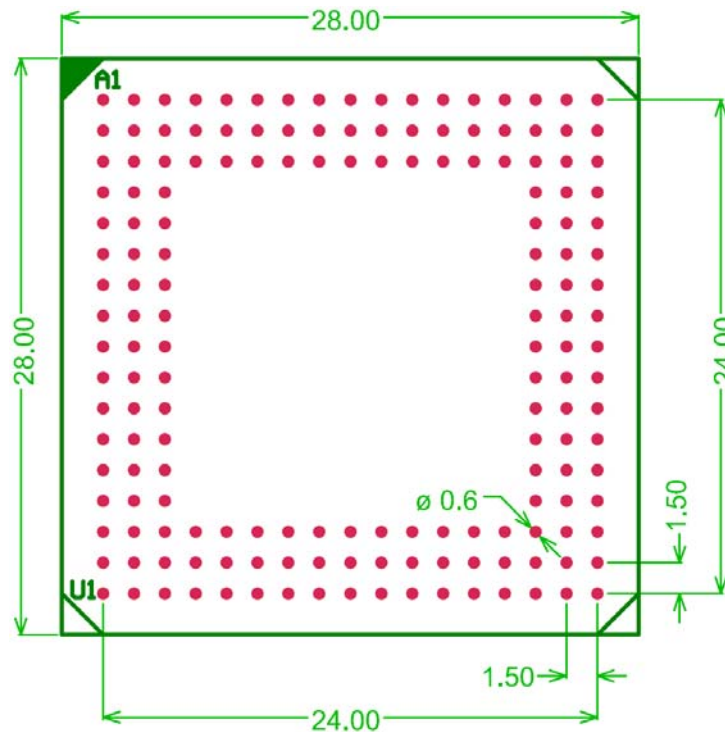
Recommended BGA Footprint for the Base Board (top view)
